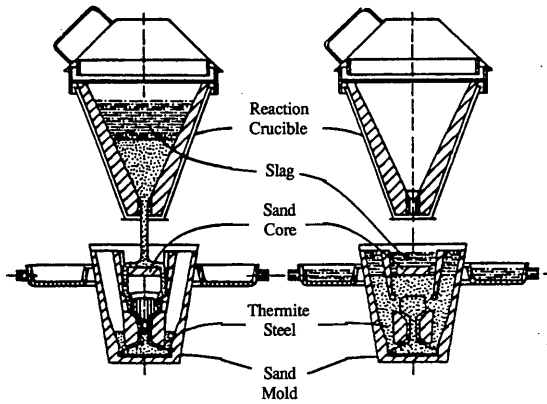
Modern full fusion thermite rail welding process (5).
